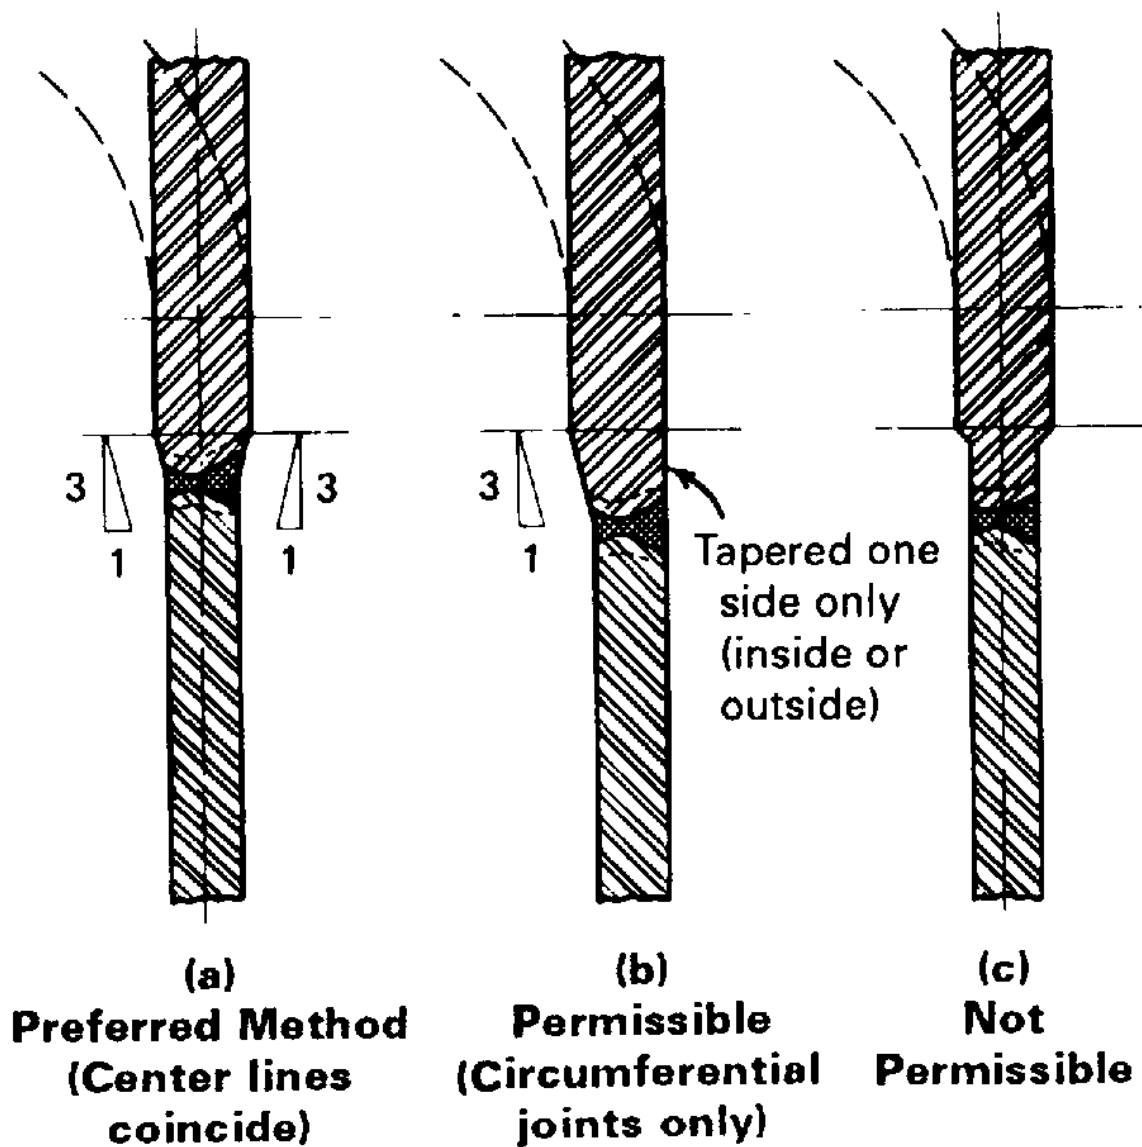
BUTT WELDING OF PLATES OF UNEQUAL THICKNESS
